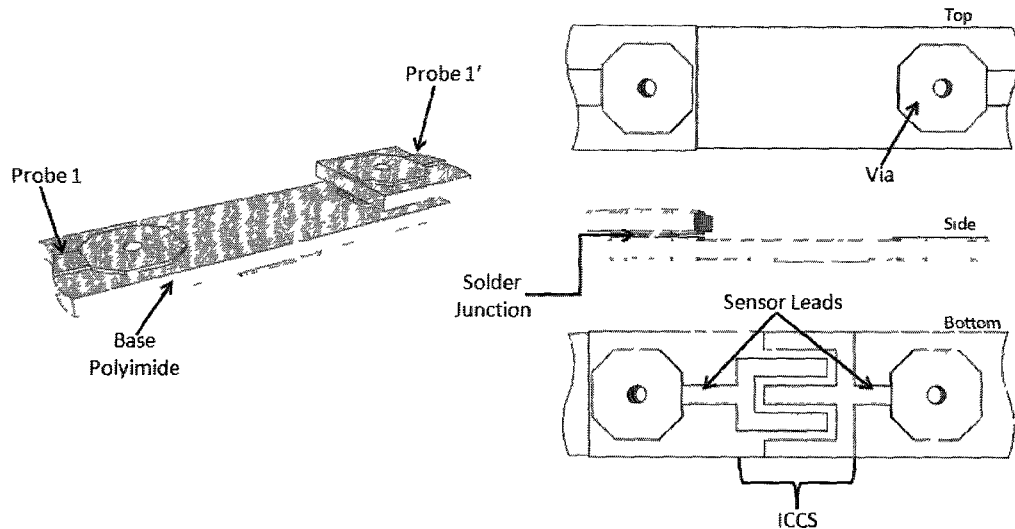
Perspective, Top, Side, and Bottom view of Sensor assembly
